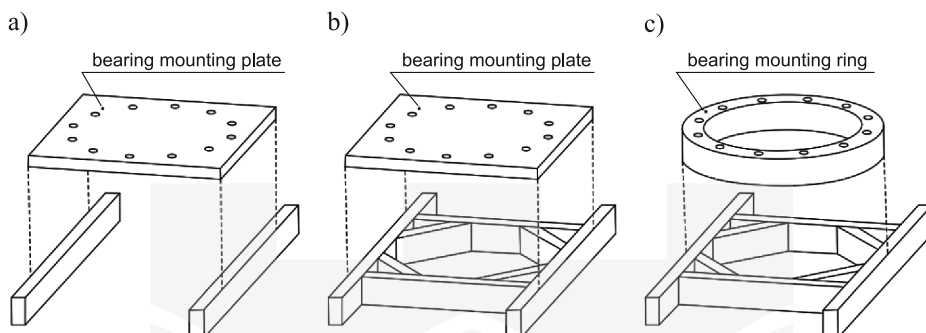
Frame without gussets near mounting holes requires thicker plate1 – model (a), Gussets added near bearing mounting holes increase rigidity – model V2 (b), Gussets added near mounting holes and ring replace plate for additional rigidity – model V3 (c)
